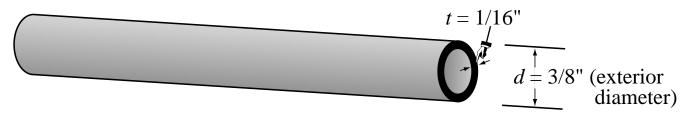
Truss member (strut) cross section schematics. End fitting details (threads and joint adapters) not shown.
